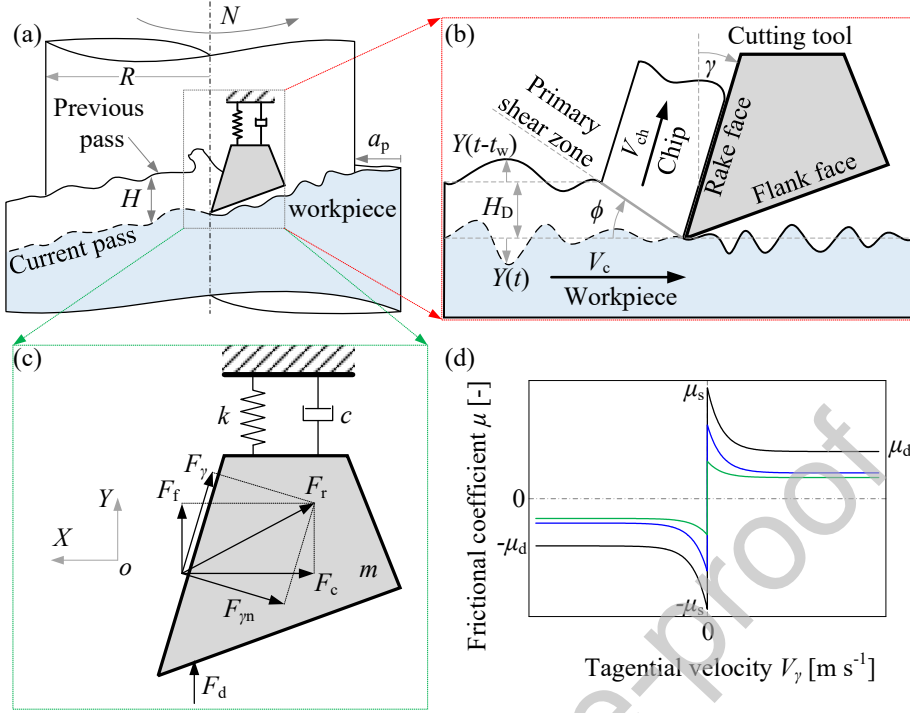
(a) Regenerative cutting operation, where (b) the chip flows along the tool's rake surface and the uncut workpiece is compressed by the tool tip. (c) Cutting and feeding forces are generated by chip-tool interaction on the rake surface, and process damping force is exerted by the workpiece on tool's flank surface. (d) Stribeck effect in the chip-tool friction for different workpiece materials [7, 8].
